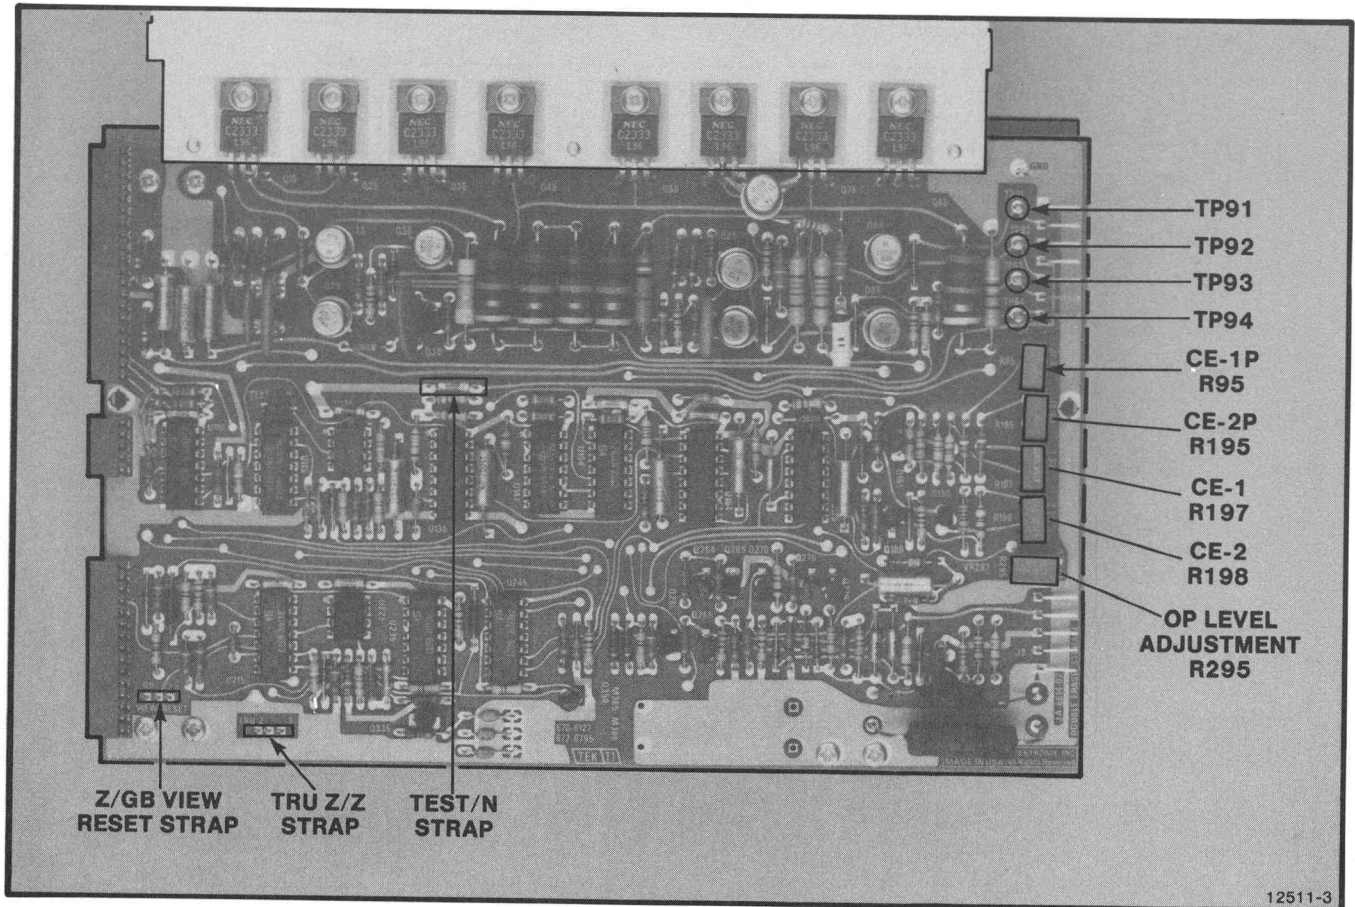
Storage Board Adjustments, Straps and Test Points.
